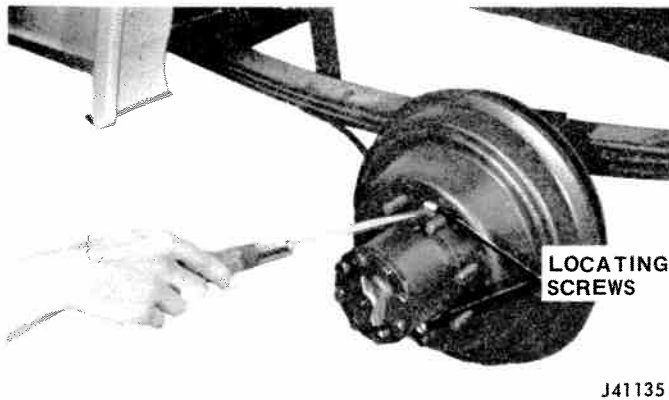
Locating Screw Removal - Model 60 Full Floating Axle
